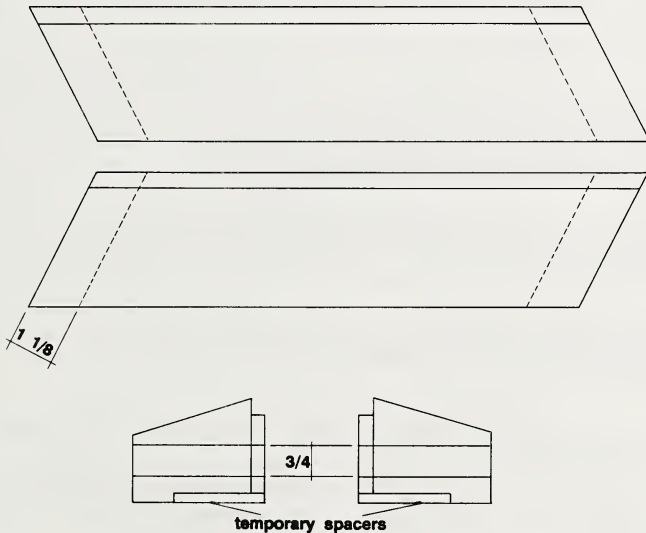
Side blocks for the skeleton frame, step 4; joints cut into the ends. (Top and end views)
